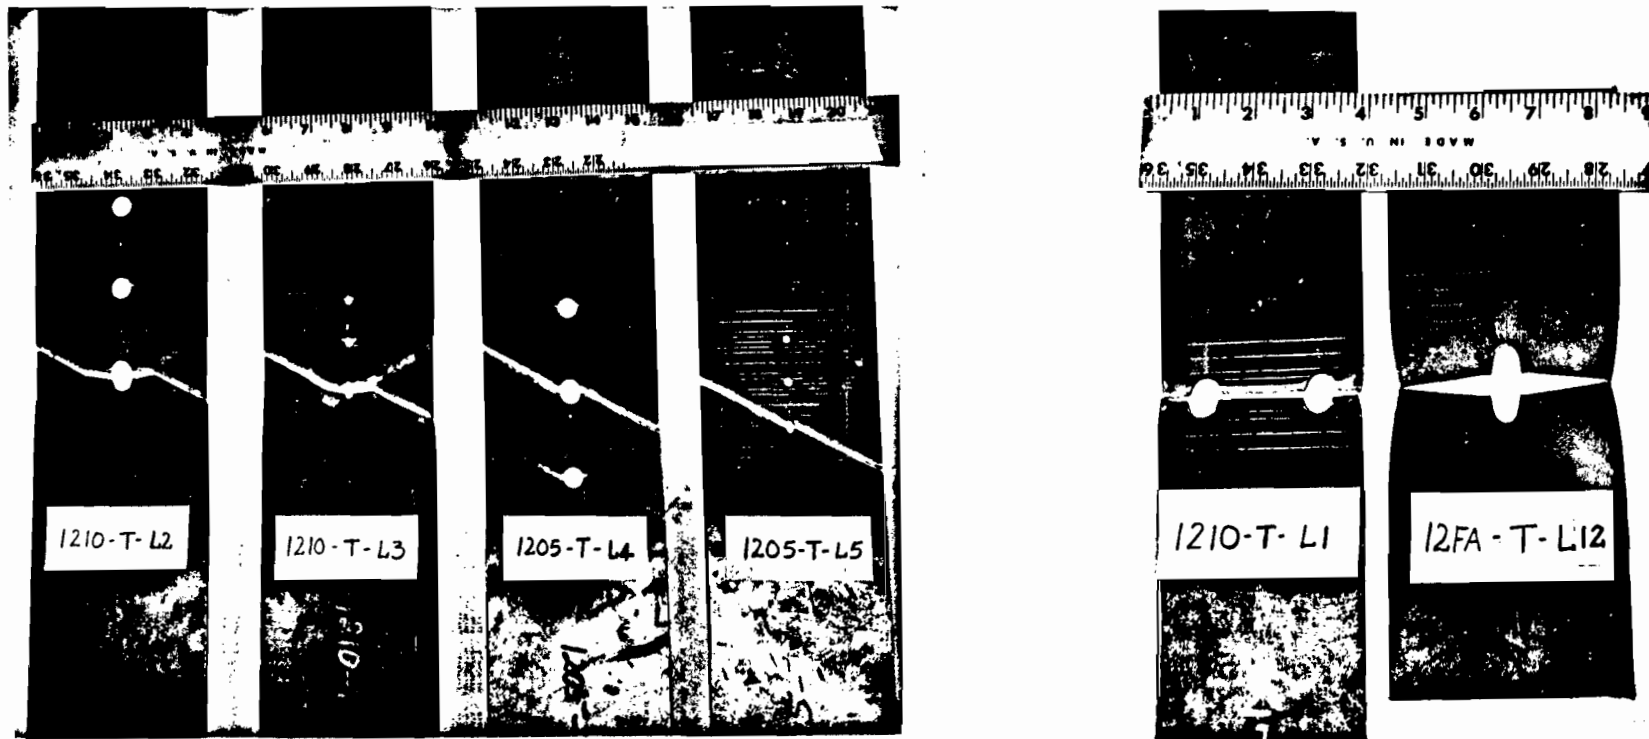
Rectangular Plate Specimens After Fracture (A Steel)
